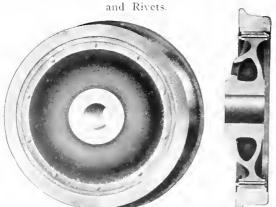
Cast Iron Plate Center, Held by Shrinkage and Bolts.
